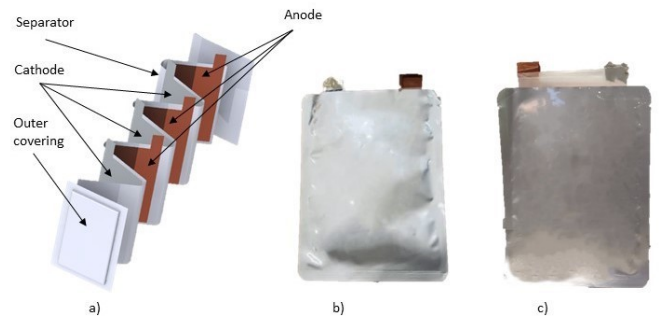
Equivalent pouch cell a) Design with exploded view, b) Physical prototype, c) Prototype with inner stack exposed
